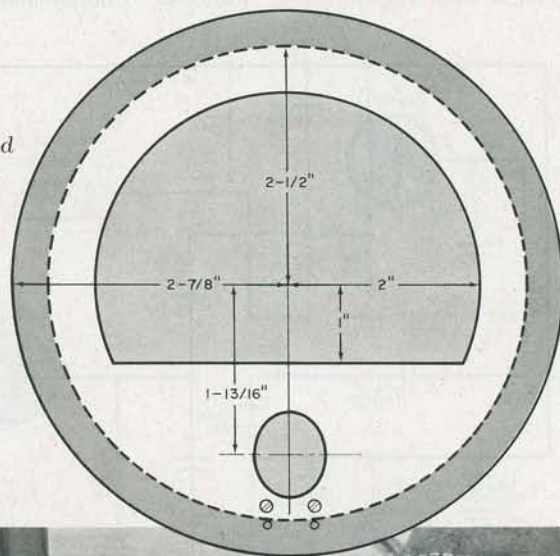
Use a coping or sabre saw to cut out the form drawn on disc in Fig. 4.
